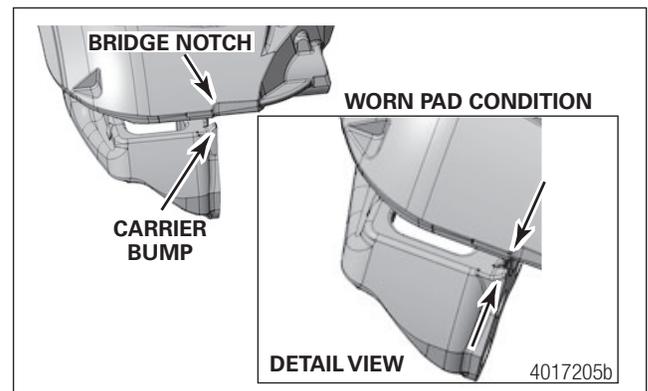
Worn Pad Condition on Later Release Design Caliper
